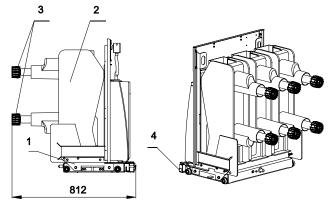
Drawout element (DE) with SION circuit breaker 1 – base plate; 2 – circuit breaker; 3 – socket contact; 4 – lock
